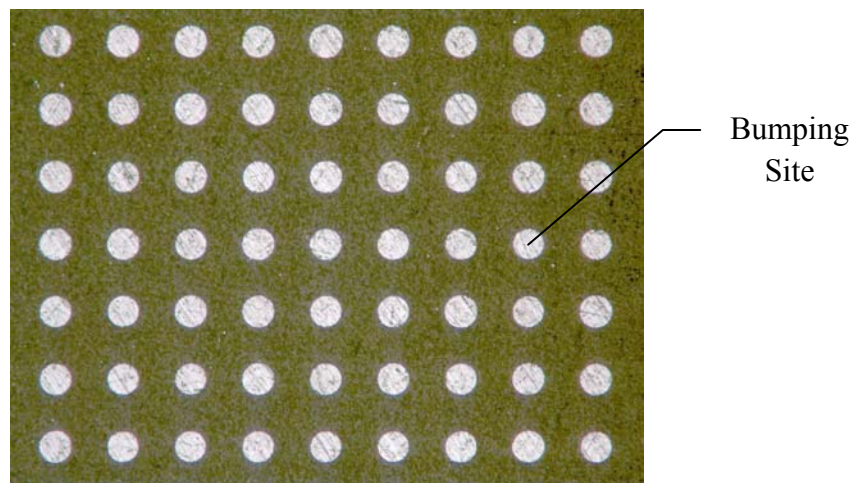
Coated wafer surface after polishing with exposed solder ball top served as the bumping site for the 2nd layer solder ball bumping
